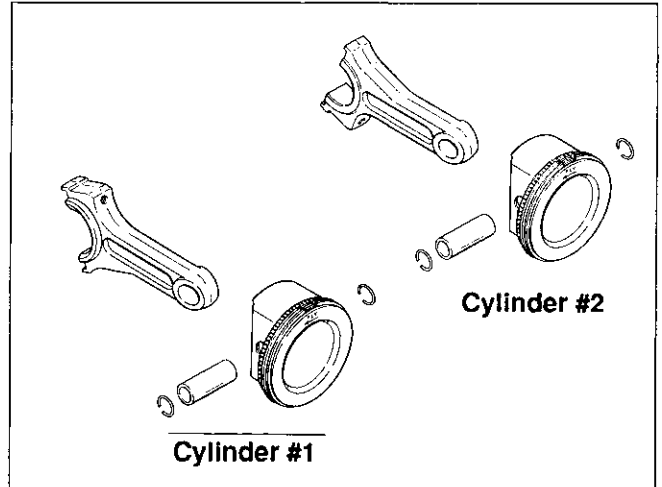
Piston, Connecting Rod and End Cap Detail.
